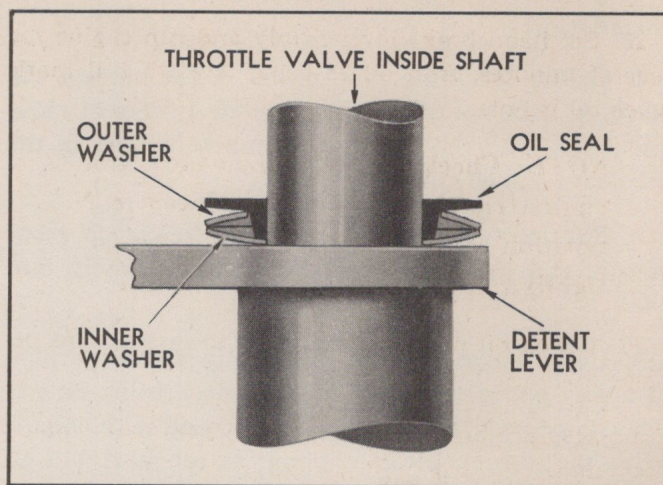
Inner and Outer Spring Washers and Rubber Seal on Manual Control Shaft
